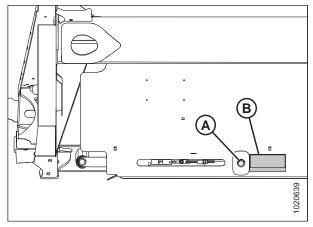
Draper Tensioner (Left Side Shown, Right Opposite)
